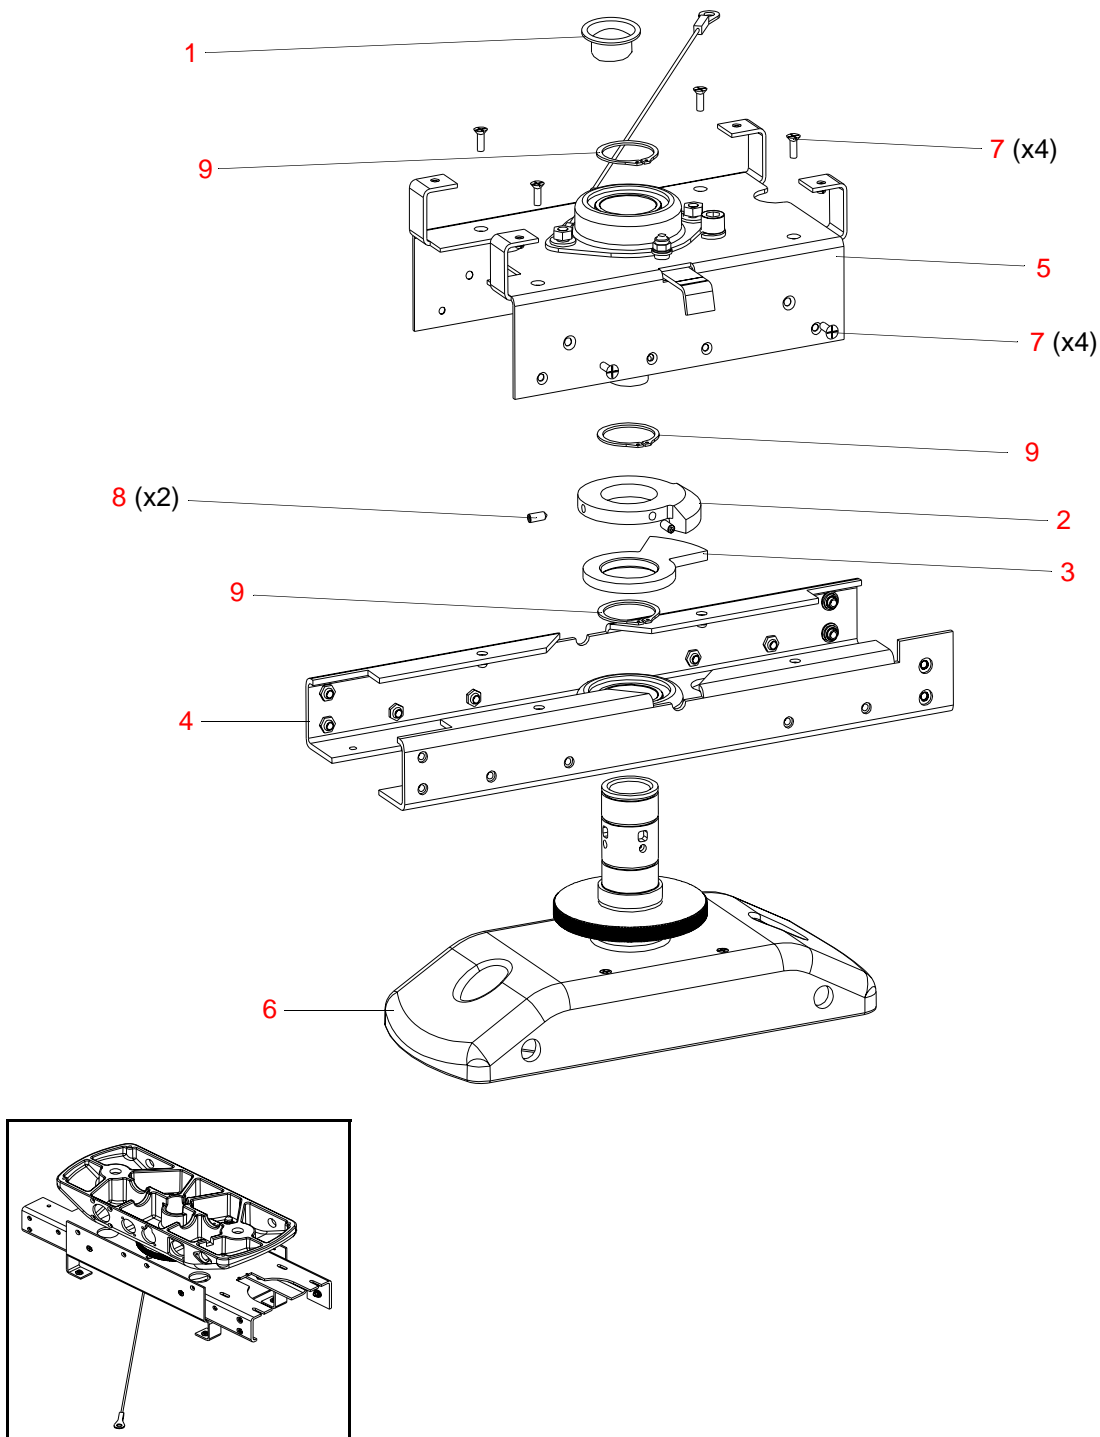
Yoke Crossmember Assembly (VL500/VL500D/VL500A)
